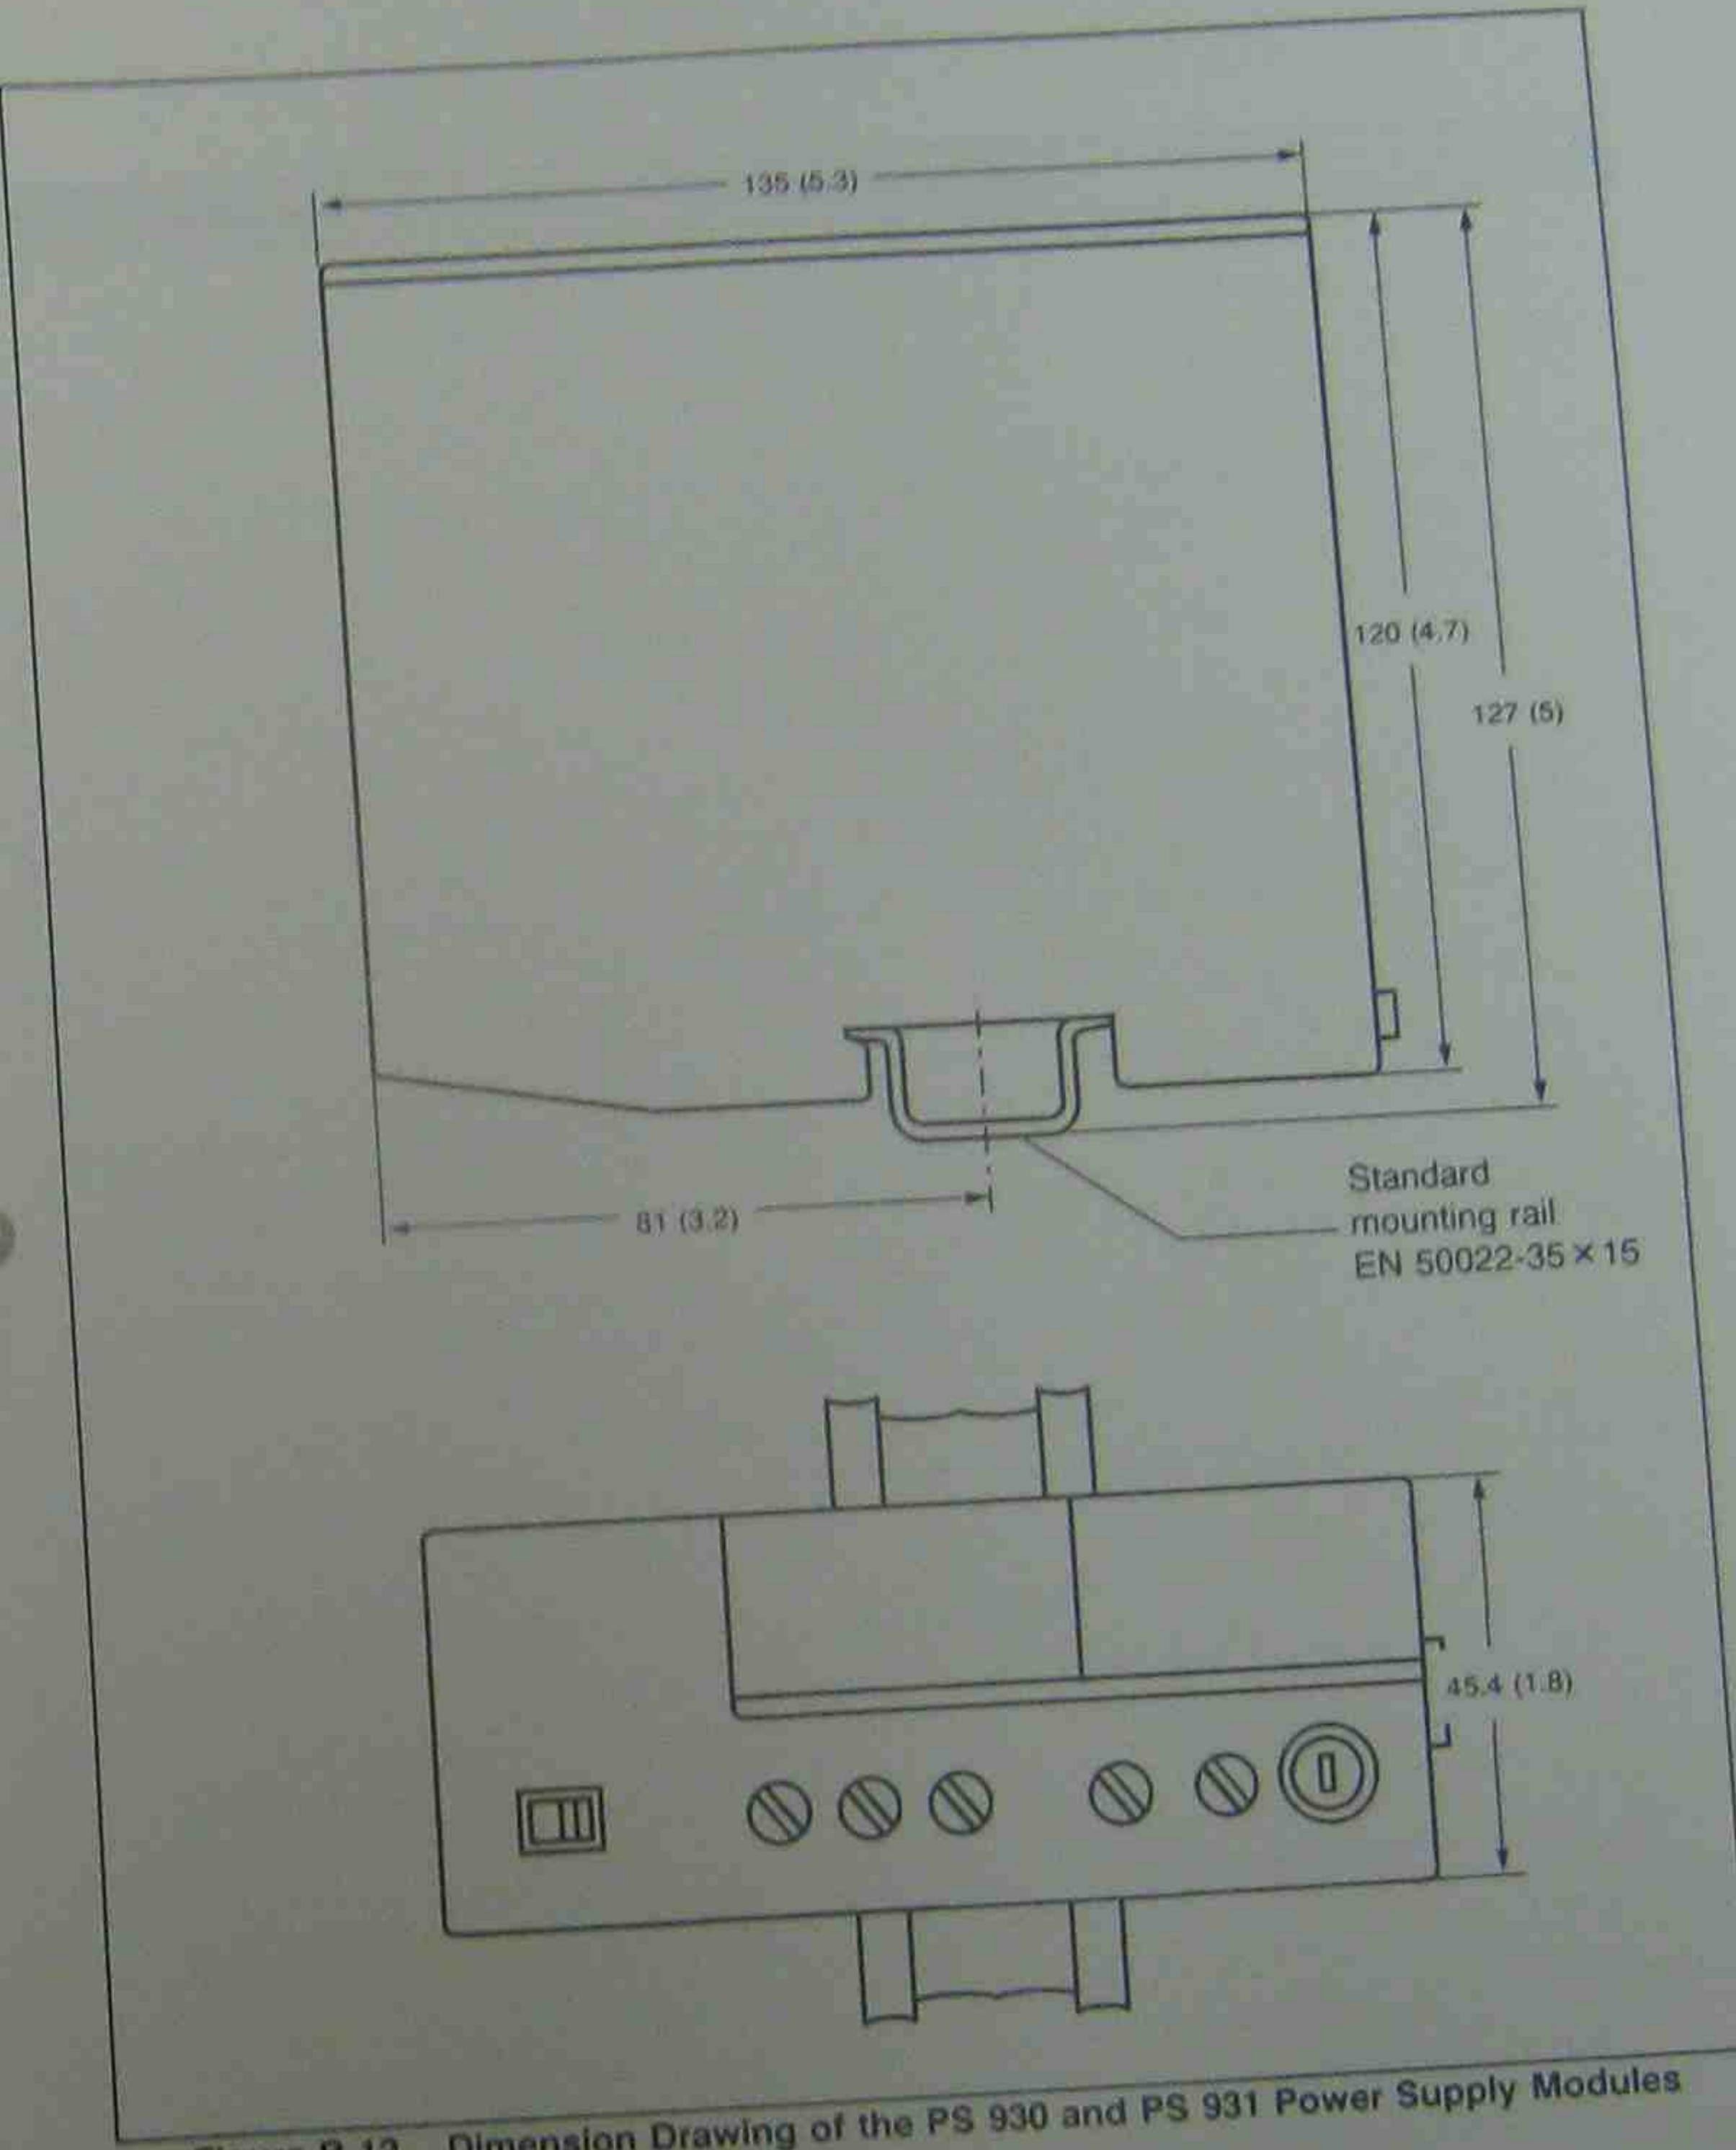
Dimension Drawing of the PS 930 and PS 931 Power Supply Modules
